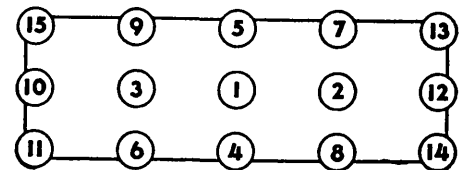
Cylinder head tightening sequence on 1951-52 four-cylinder engine
